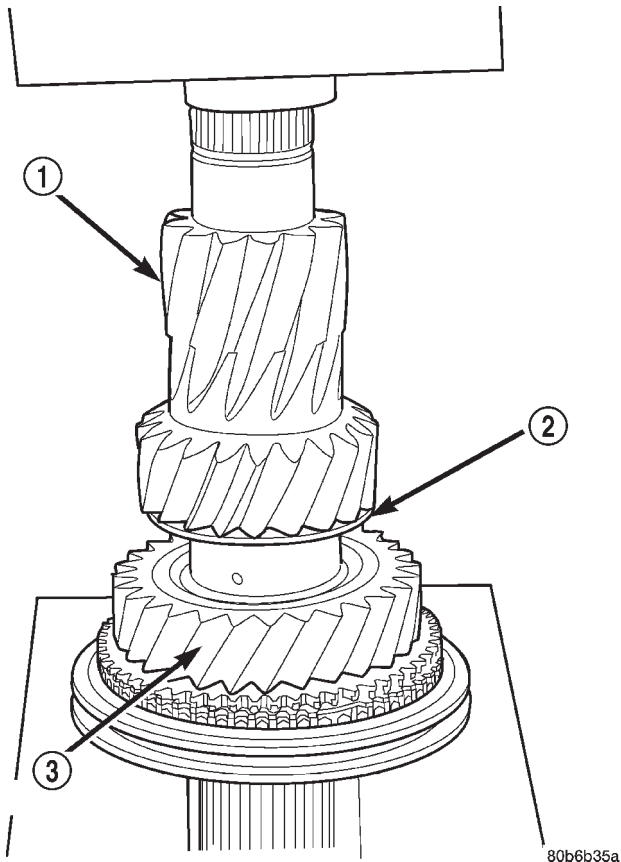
COUNTERSHAFT INTO 3-4 SYNCHRO
